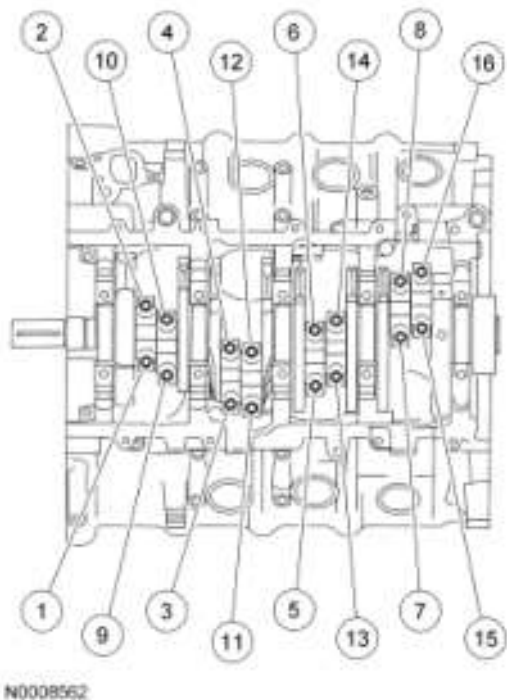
Identifying Tighten Sequence Of Connecting Rod Bearing Caps
